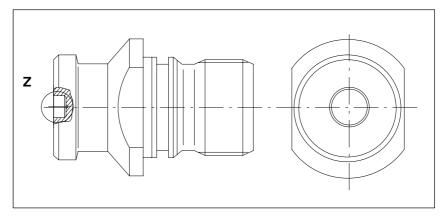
Example of mounting the MDS E623 in a retention shaft
